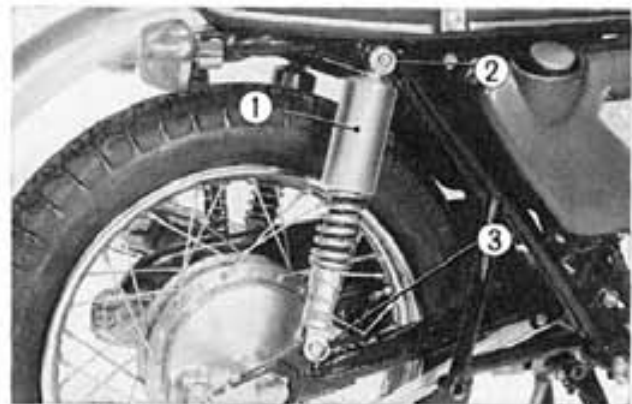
① Rear cushion ② Cap nut ③ Setting bolt
